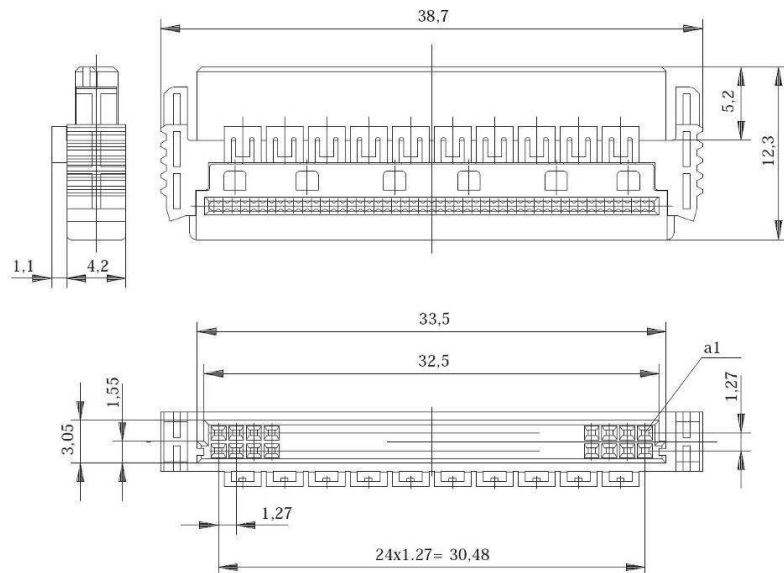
coolteq.h Modulator Envelope, Control & Monitor Interface, Ribbon Cable Connector Mechanical Drawings
